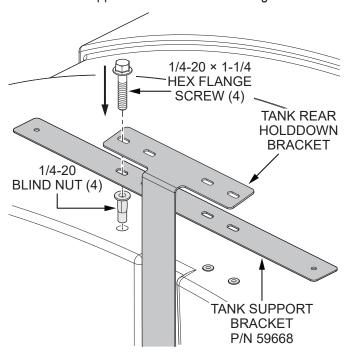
Install Tank Support Bracket (Rear Of Tank)
